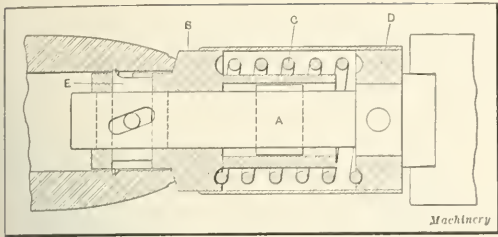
Special Recessing Tool used for performing Operation E shown in Fig. 113
